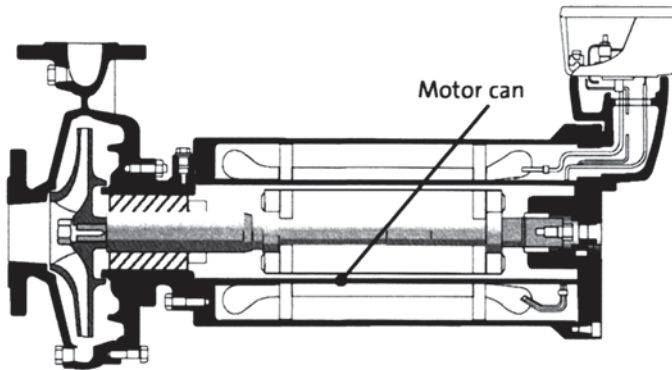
Canned motor chemical pump. (courtesy Grundfos)
